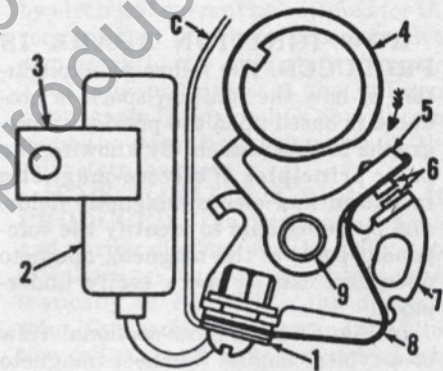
Typical flywheel magneto breaker point unit. Cam (4) is driven by engine crankshaft. Breaker arm spring (8) connects insulated contact point on breaker arm (5) to terminal (1).
